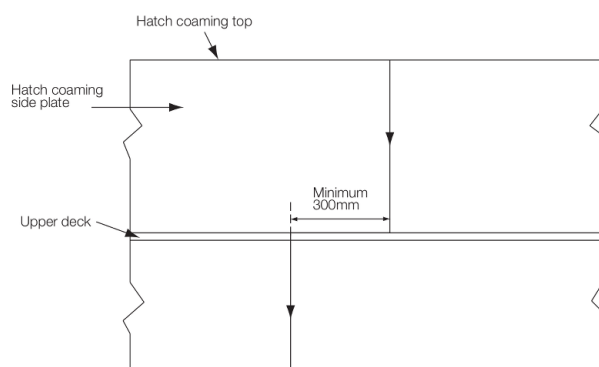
Minimum offset between block-to-block butt welds of the hatch side coaming and those of the upper deck staggered
